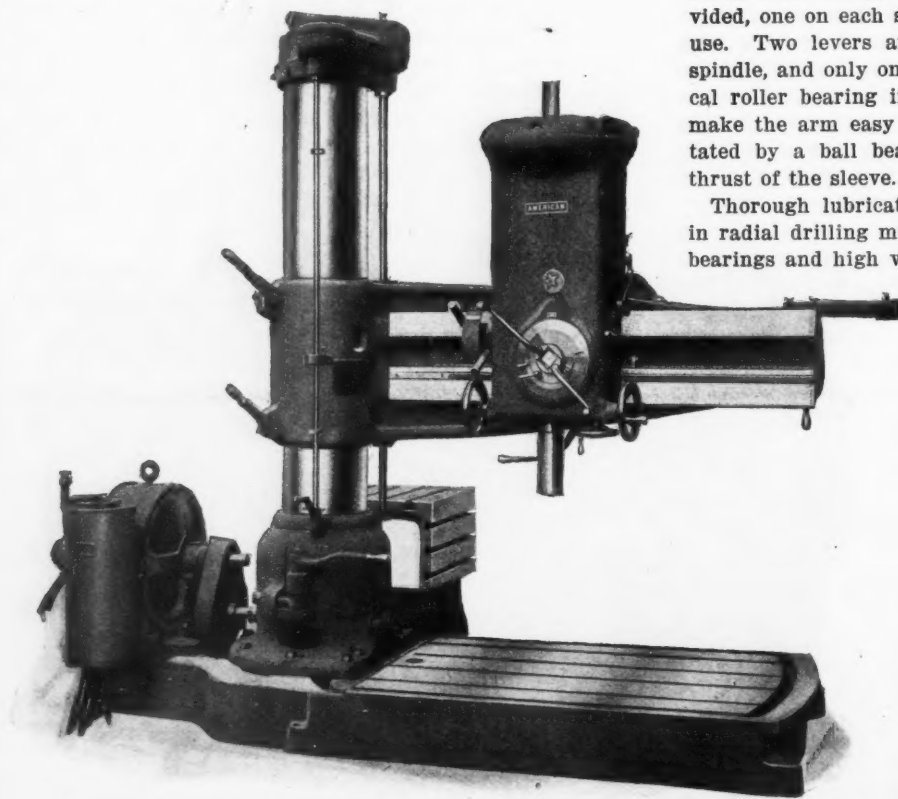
American "Triple-purpose" Radial Drilling, Tapping and Boring Machine
